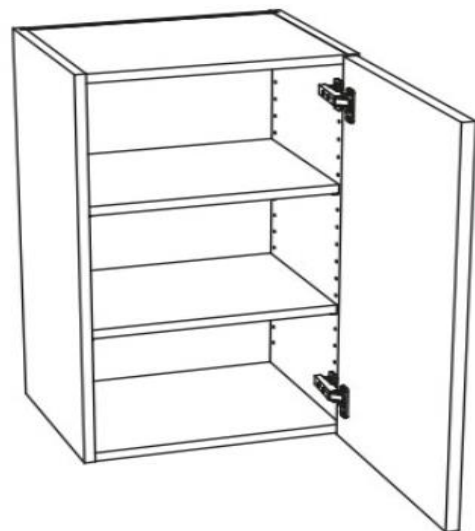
, shows a picture of the UV-lacquered MDF kitchen door Plan and its application in a kitchen cabinet.
